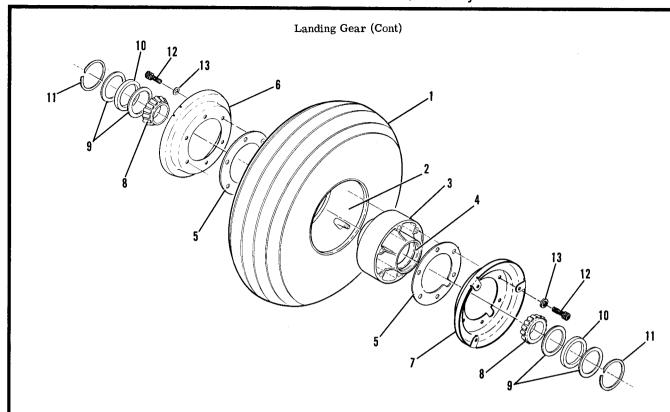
B.	Nose	Gear	Wheel &	Tire Assembly
